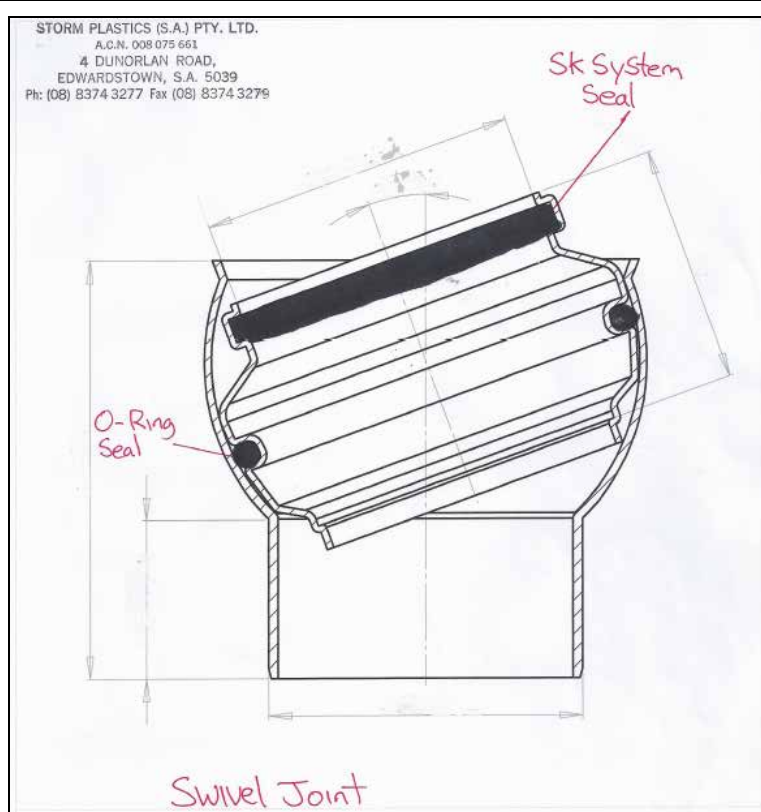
Swivel Joint with 'O-ring seal' and 'SK System seal'
